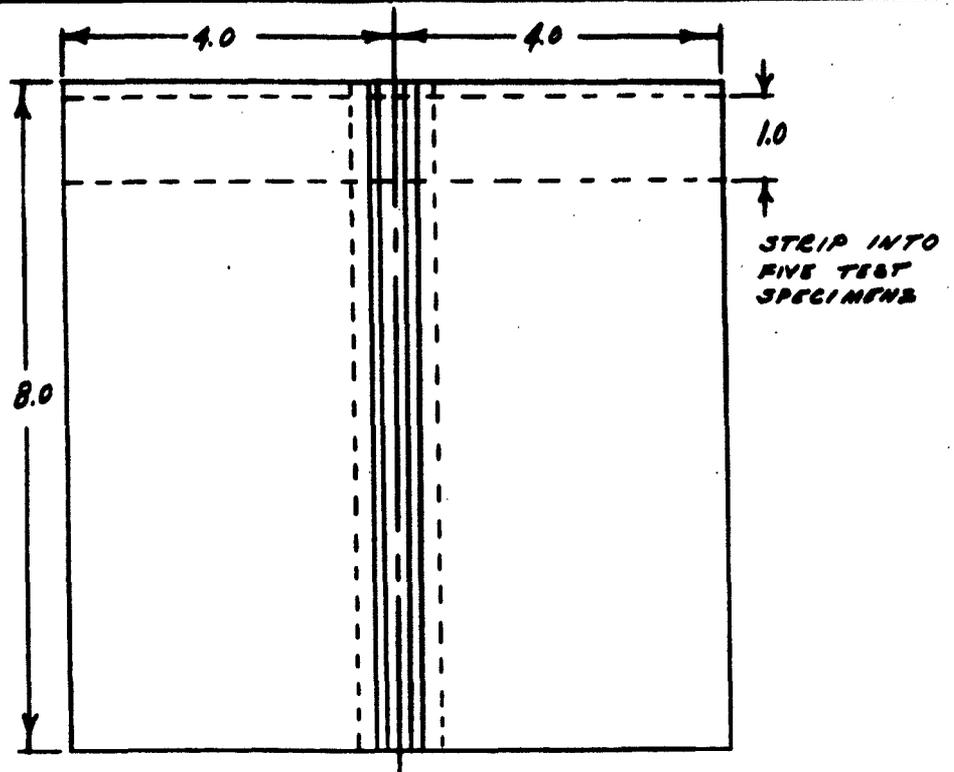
WELD SPECIMENS 2 MADE
